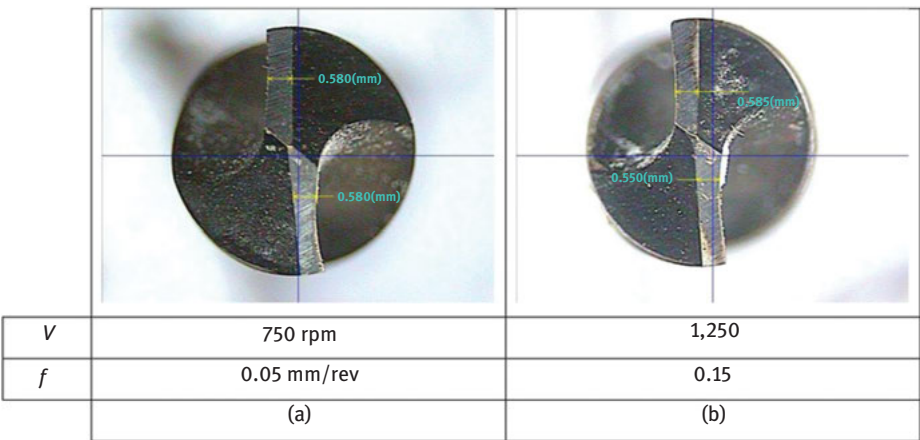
(a) and (b) Flank wear observed on drilling tools during machining of GFRP.
